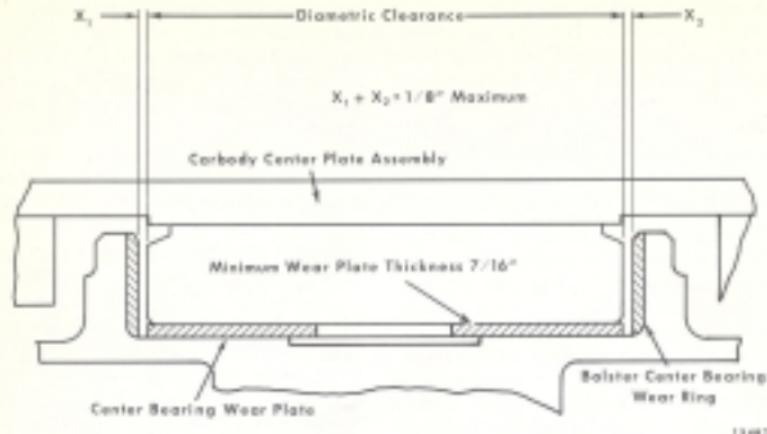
Center Bearing Wear Plate And Wear Ring Limits
